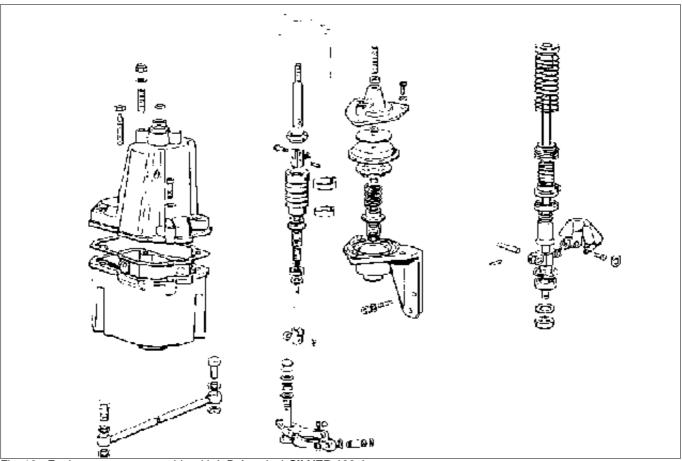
Engine governor assembly with L.D.A. valvel SILVER 100.4.
